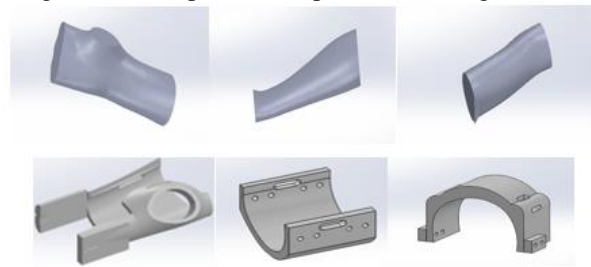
the real limb parts and modified designs for the Exoskeleton device.
